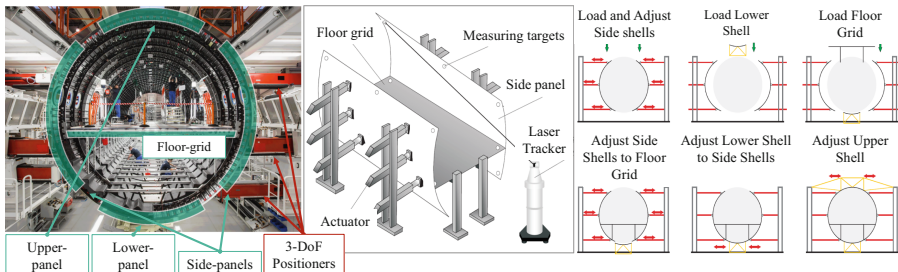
Left: major-component-assembly station for section assembly of the A350 XWB fuselage ©Premium AEROTECH. Middle: positioning system and structure assembly of aircraft sections with laser tracker [5]. Right: general steps of the major-component assembly process [6]
